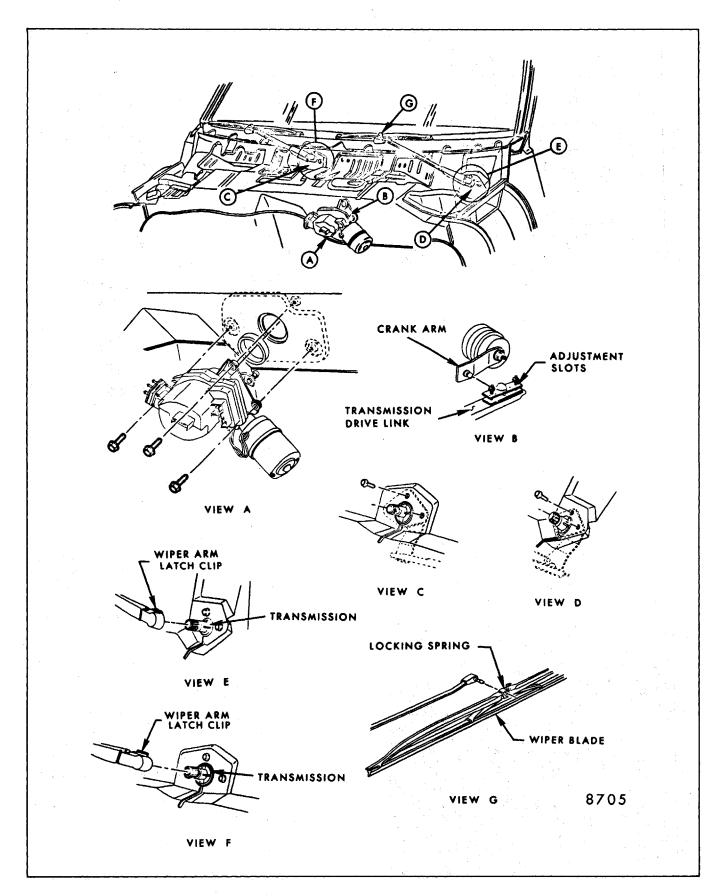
Round Motor and Transmission Installation - K Style
